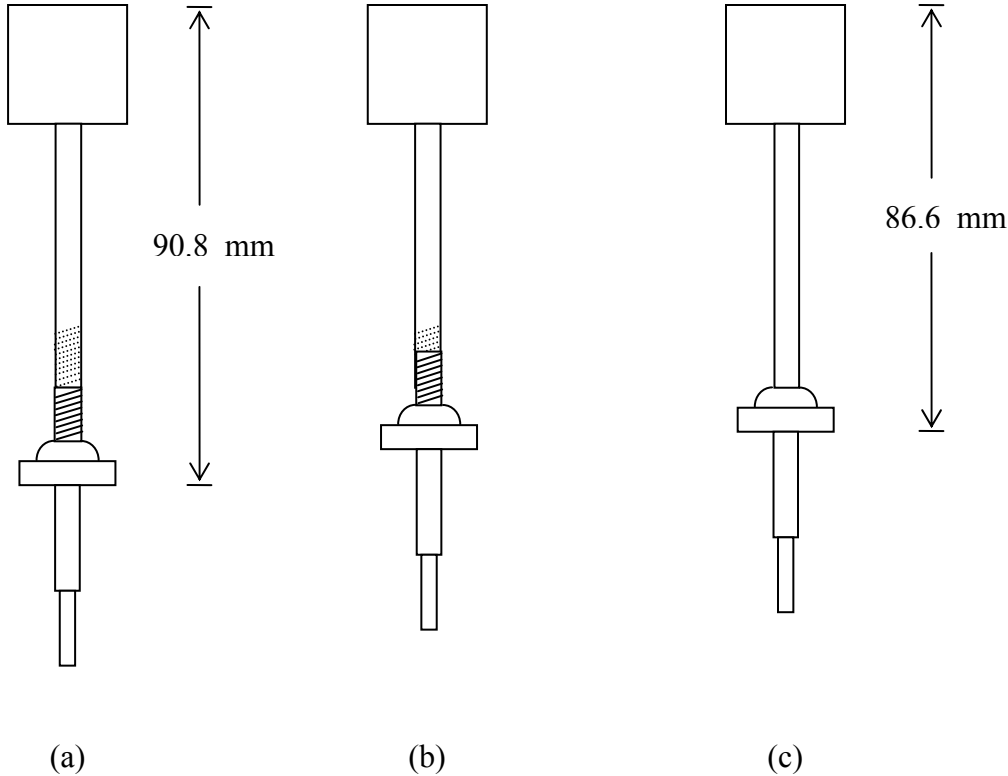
Relative Engagement of Permanent Magnet Piece with Bearing Cone Piece
